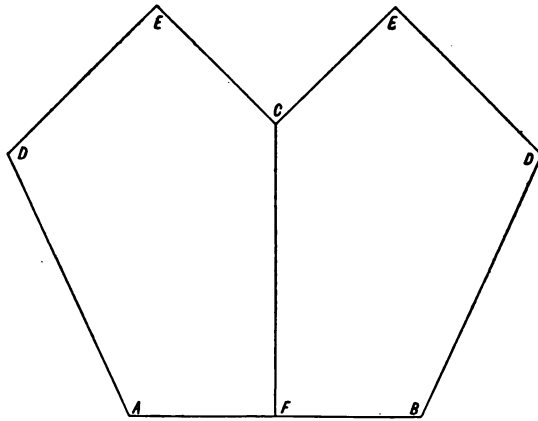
An Elevation, or a Section of a Two Pronged Fitting.
